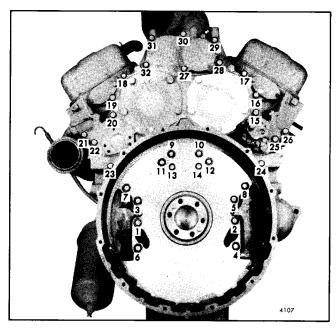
Flywheel Housing Bolt Tightening Sequence (Operation 2)--8V Engine
